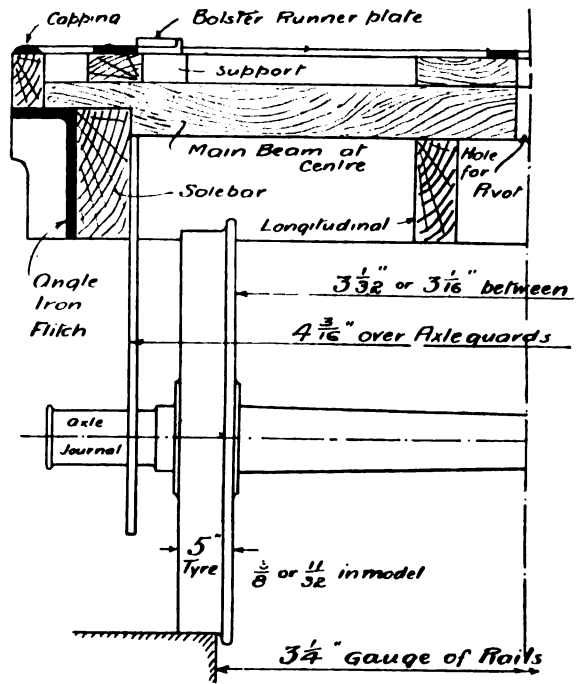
HALF-SECTION THROUGH CENTRE OF TIMBER TRUCK. (Scale: Full size for model.)
